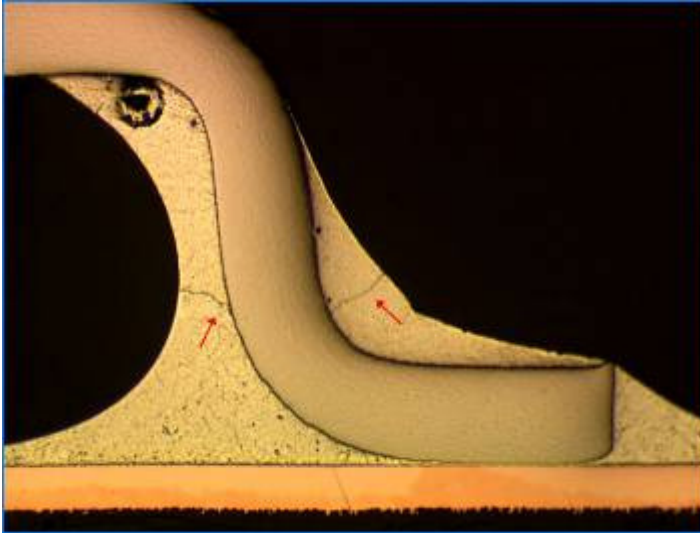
cross section, SN68, U16, right lead solder partial crack, 100x
